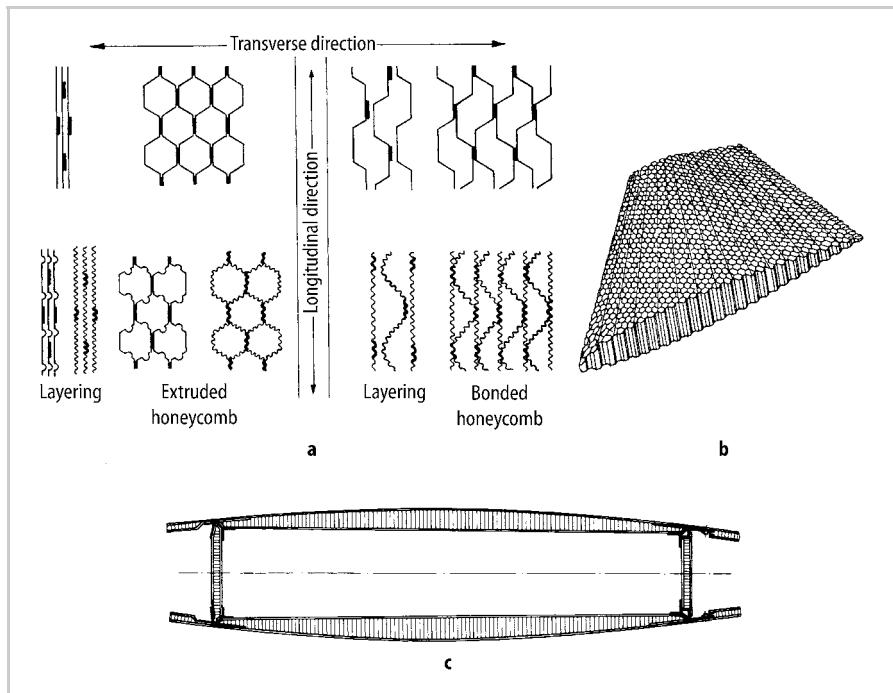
Sandwich construction for lightweight structures [3.30]. a A few honeycomb structures. b Completed honeycomb structure. c Sandwich box girder
